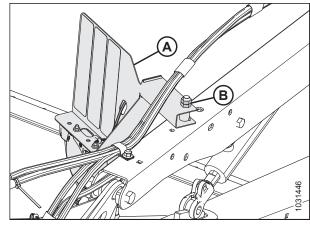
Right Light Assembly in Shipping Position – D1X Headers
